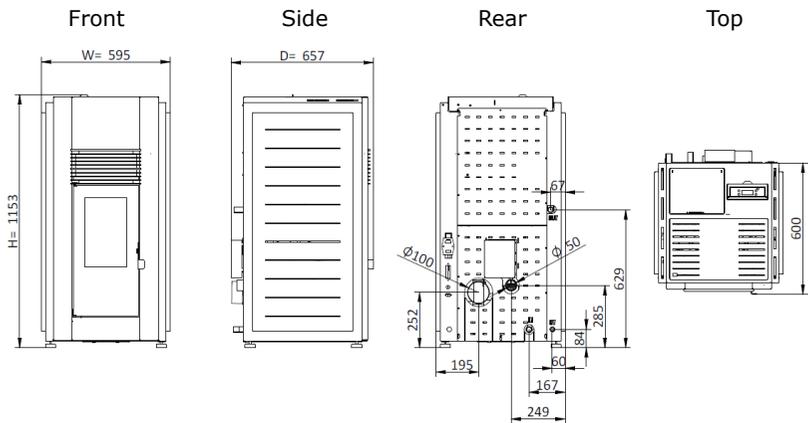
Dimensions of the free standing pellet fire unit (Douro 17 kW)
